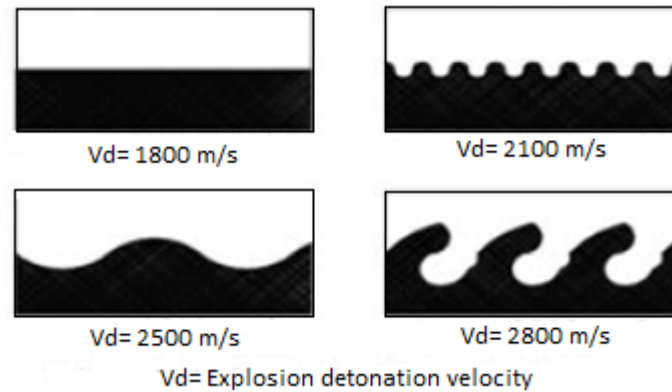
Wave forms in Explosion weld [33]
